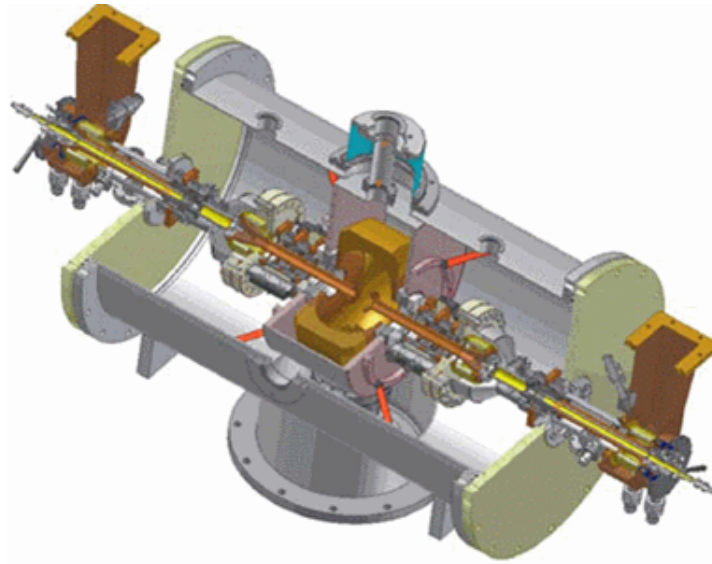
Coupler test cryostat assembled with coupling cavity and two couplers.
